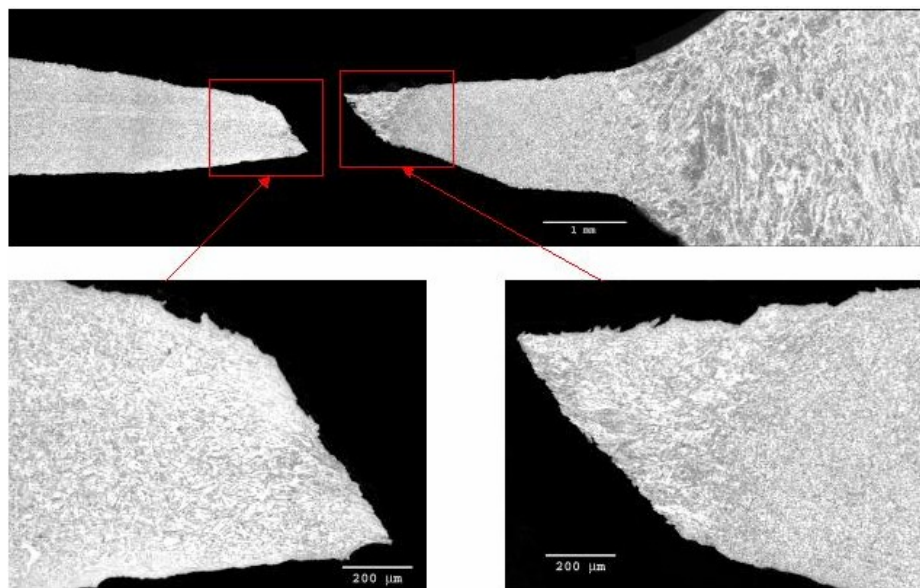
Metallographic cross section of tear #6-2. This sample contained a single repair weld. Grinding on the outside surface ended fairly abruptly at the edge of the back-up bar, resulting in a fairly deep but narrow region of liner thinning. Tearing occurred in the heat affected zone adjacent to the weld, and was accompanied by substantial localized plastic deformation.
